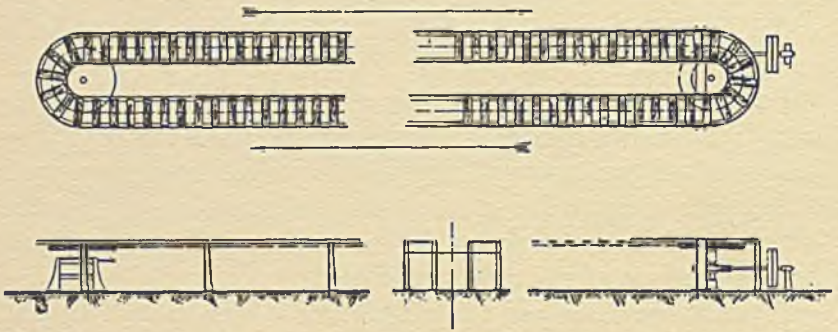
Plan and Elevation of Double-service Slat Conveyor.
